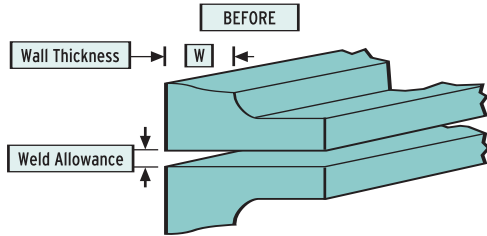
14 Vibration Welding Common Butt Joint
